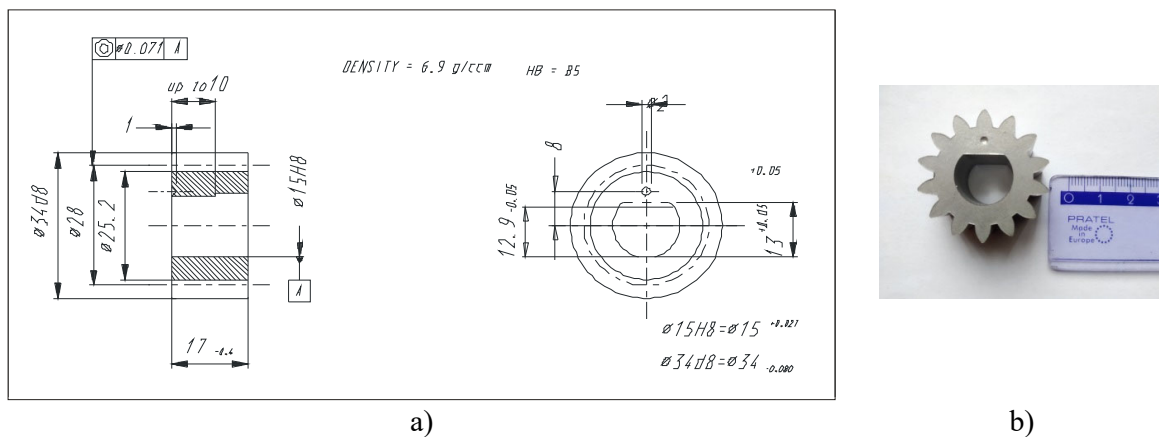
Ritzel gear; a) technical drawing, b) sintered gear
